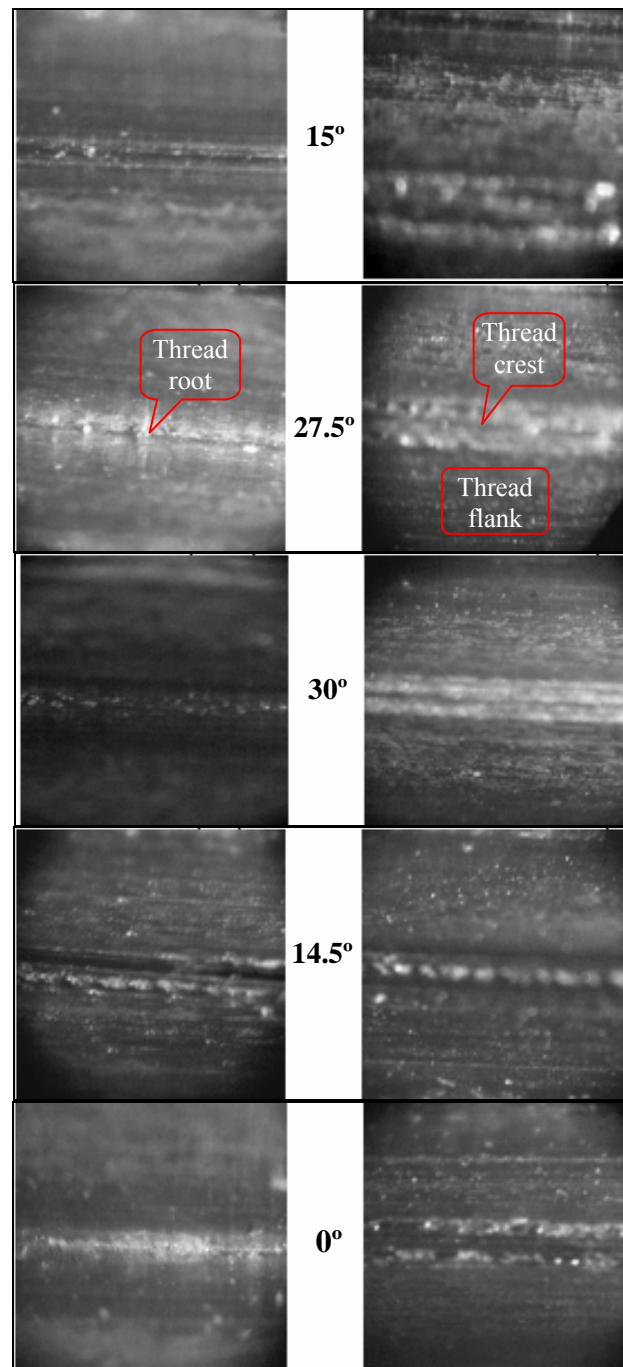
Microscope images of the thread surface obtained after machining (20X).
